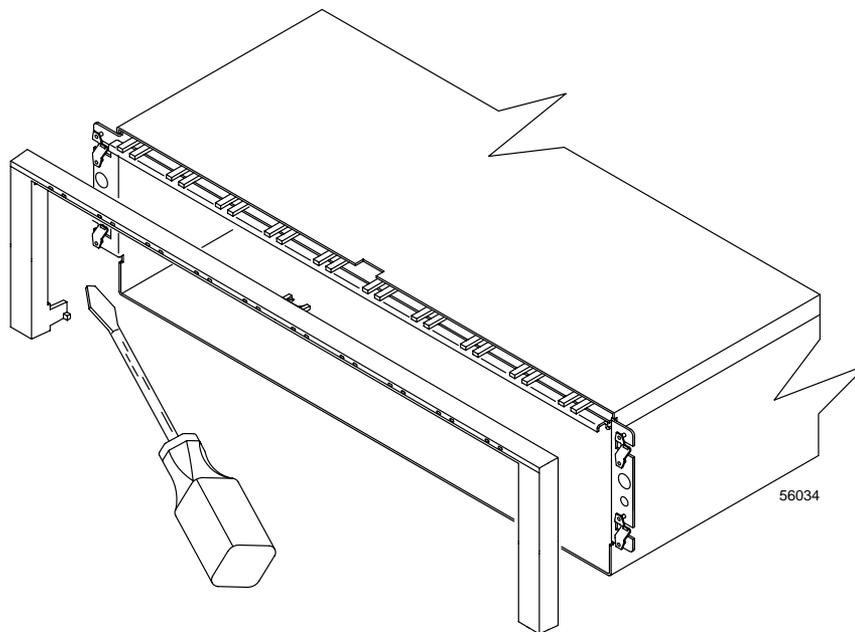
Removing the Front Bezel from the Drive Enclosure
